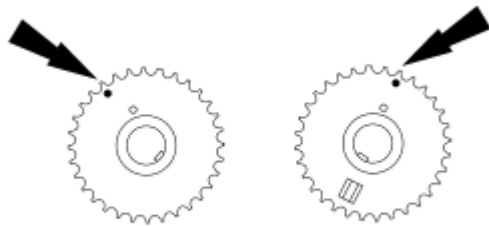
Identifying Camshaft Sprocket Timing Marks
